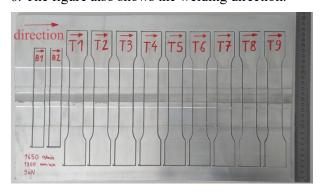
Aluminum alloy welded plate with cut-out specimens
